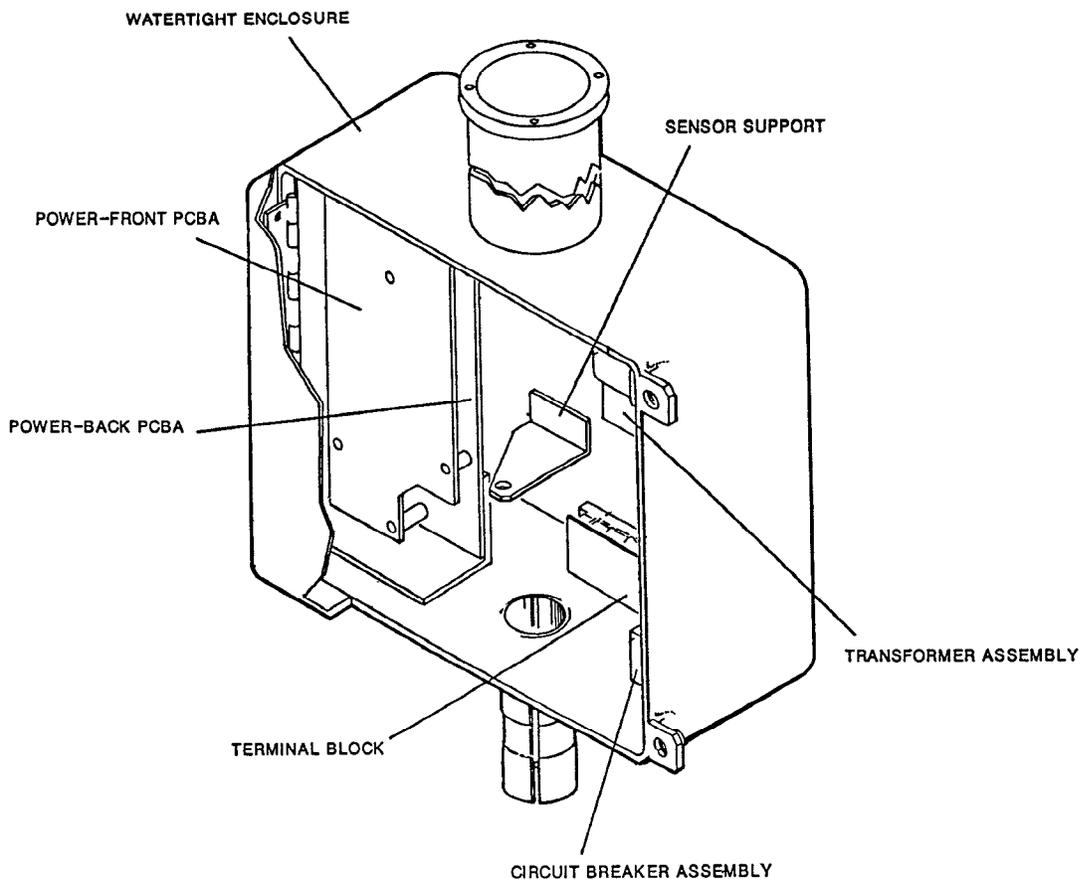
Wind Speed and Direction Sensor, Power Assembly
